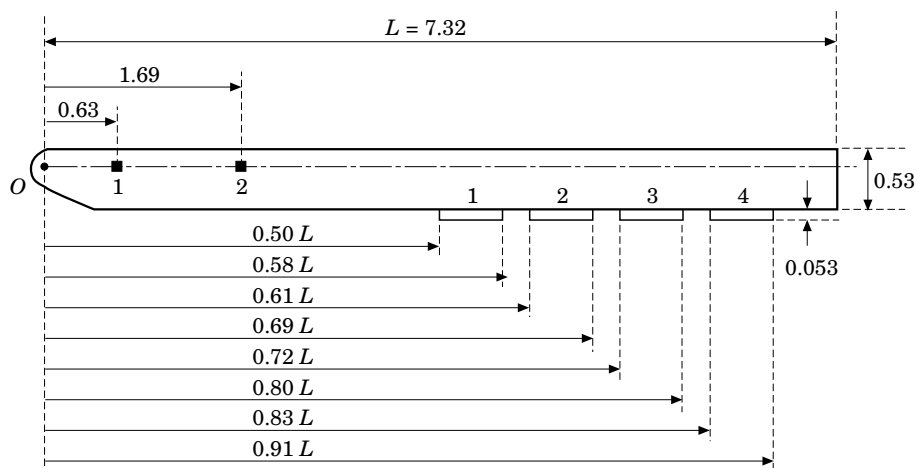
The geometry of the blade (all dimensions are in meters). ■, Balancing weight location.
